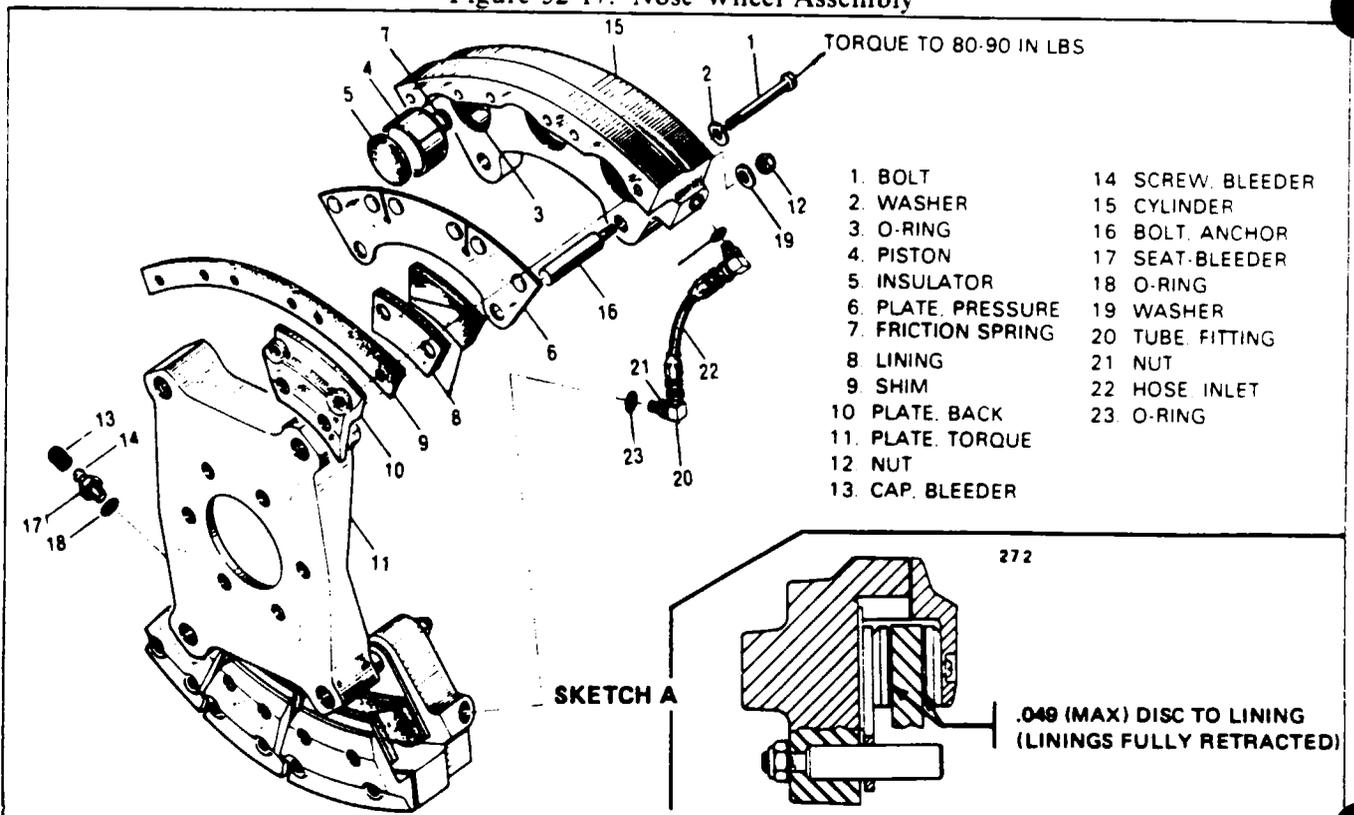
Wheel Brake Assembly (Cleveland 30-123)
